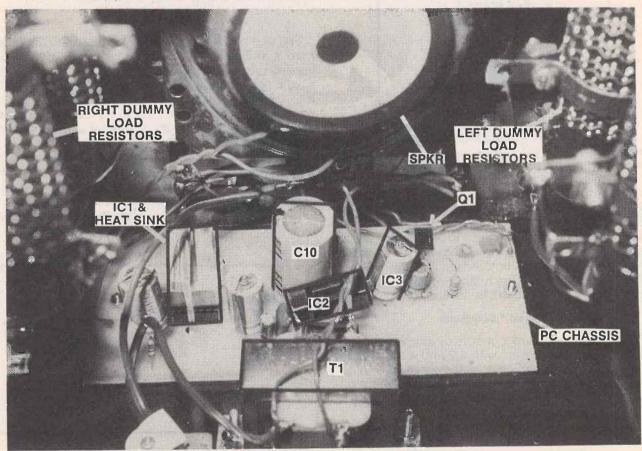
The components are mounted, soldered and ready to go. The tracer may be tested before fastening down inside the cabinet.
